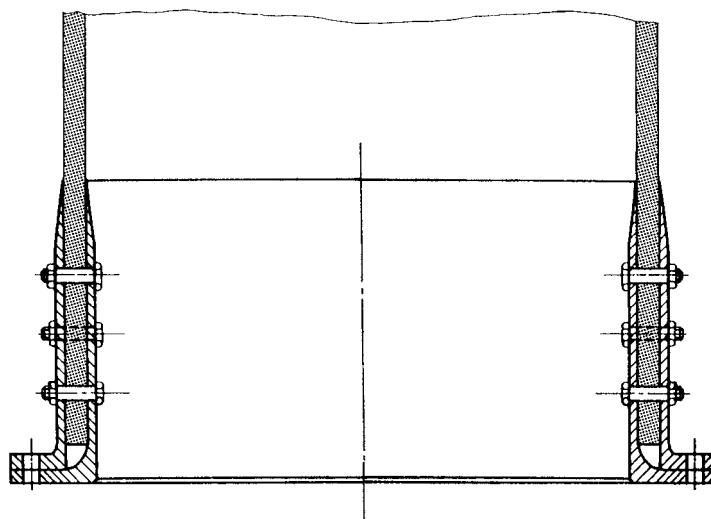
Heavy dual steel flange in earlier rotor blades
